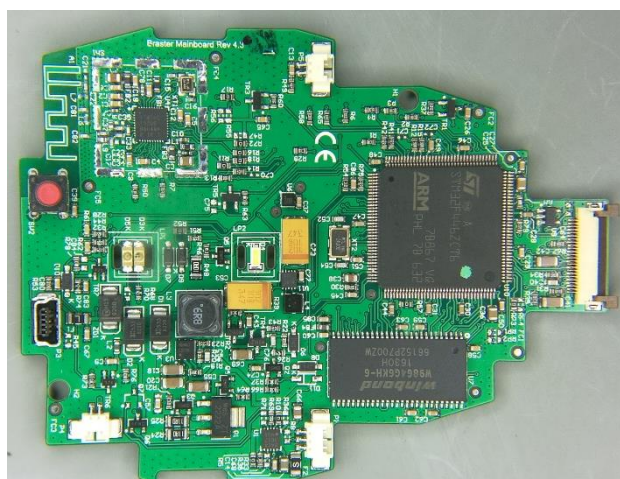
Top view of the Main Board PCB (without RF shield)
